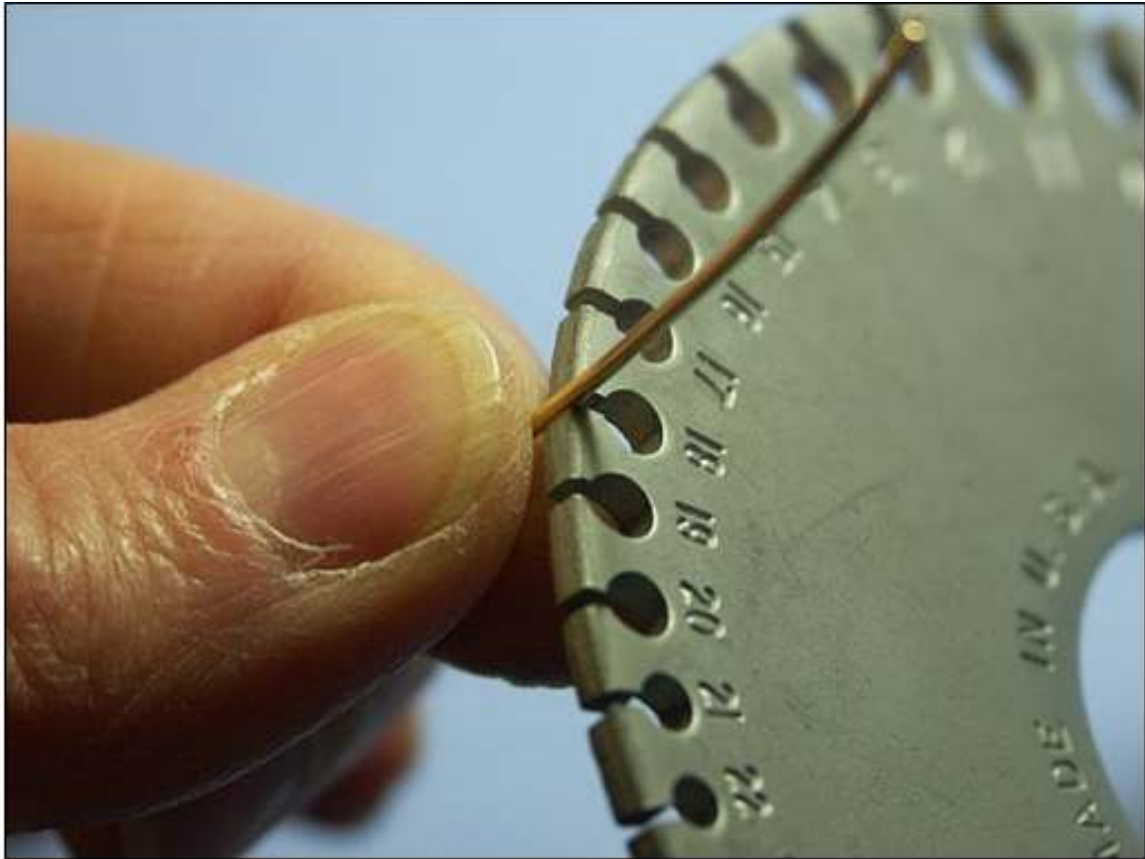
Wire Drawing – Check the Wire Size with a Wire
